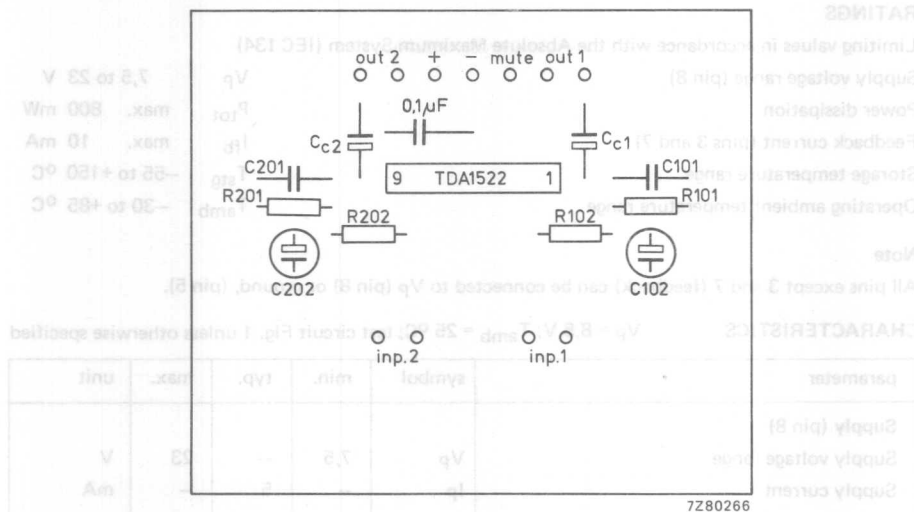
Printed-circuit board component side, showing component layout for circuit of Figure 1.
